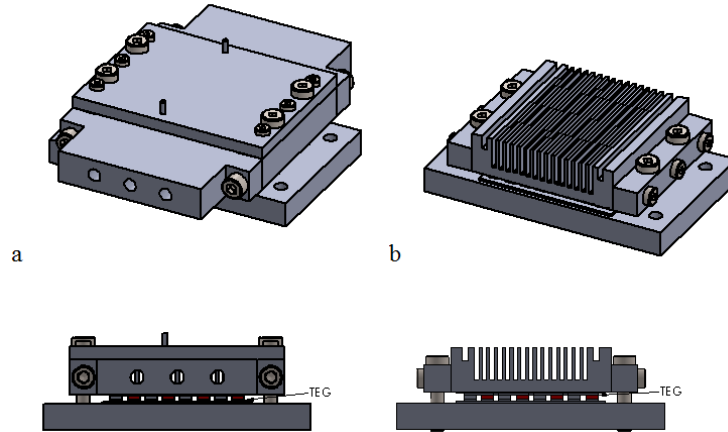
a) Water cooled heat sink / TEG module clamping b) Air cooled heat sink / TEG module clamping
